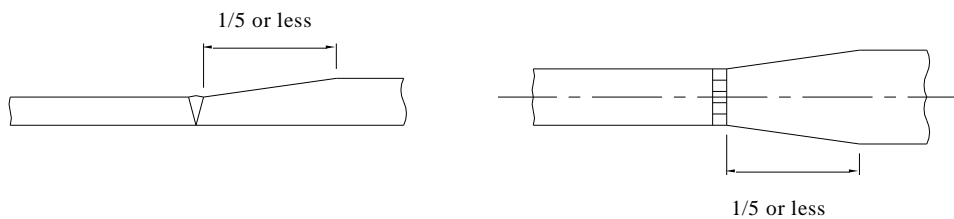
Full Penetration Groove Welded Joints with Different Cross Sections
